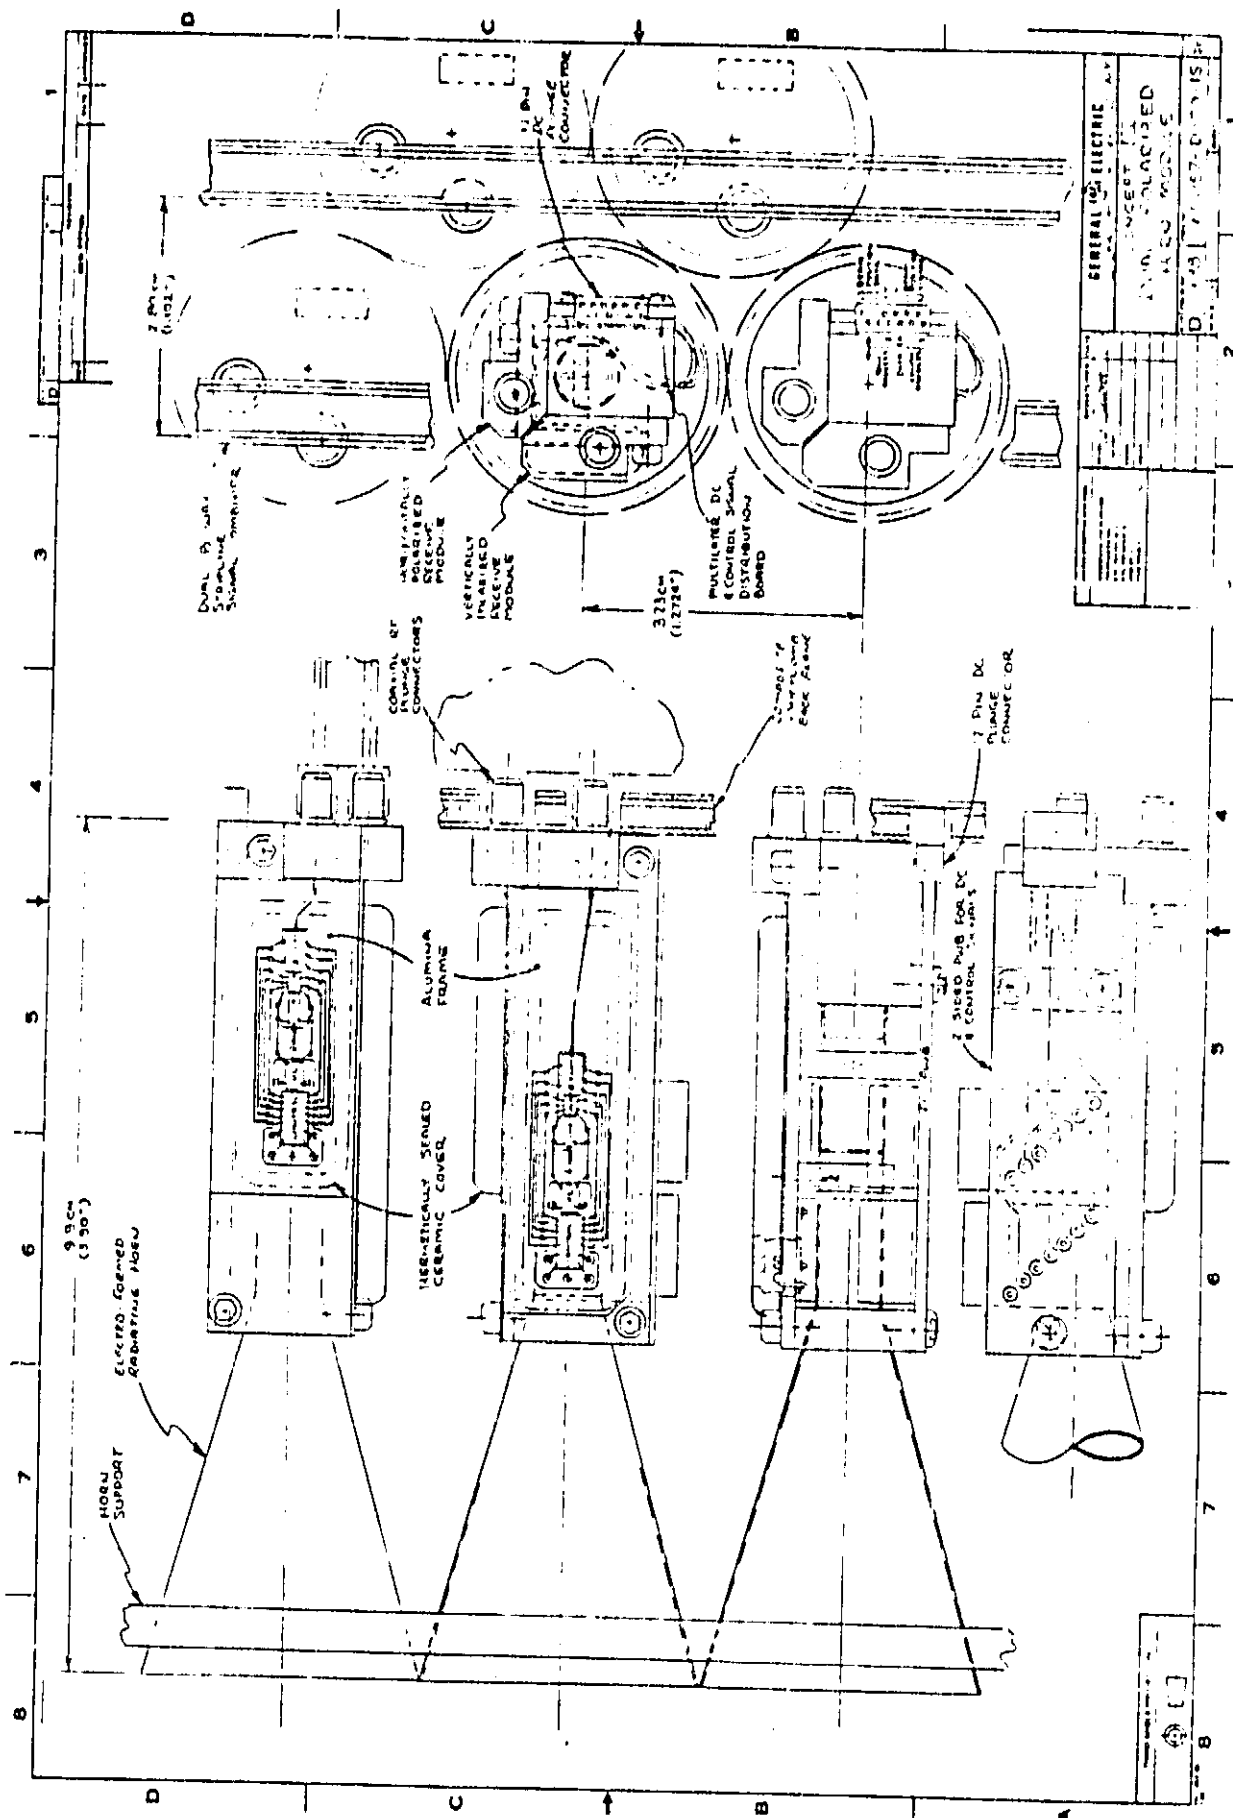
Design of Conical Horn Radiator/MMIC Receive Module Assembly
